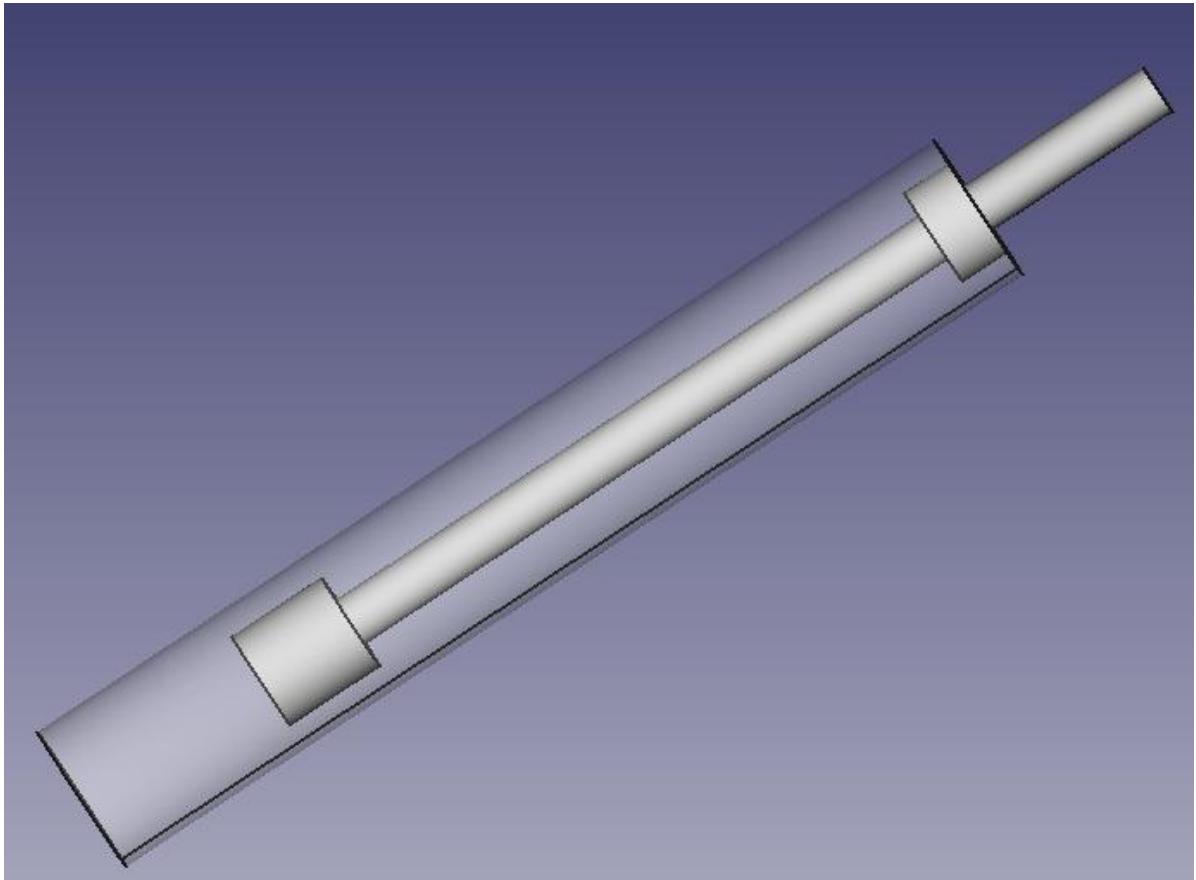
Plunger assembly test fit into tube with centering ring set screwed into place.
